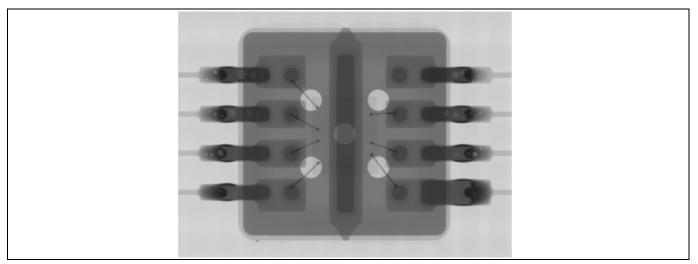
Example of properly soldered DFN pressure sensor package inspected by x-ray.
